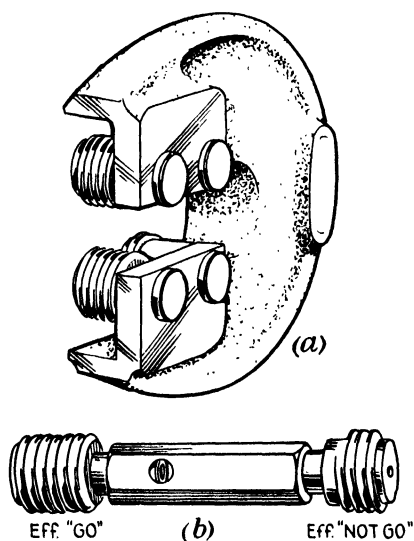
MATRIX ROLLER TYPE ADJUSTABLE LIMIT THREAD GAUGE AND SETTING PLUG
